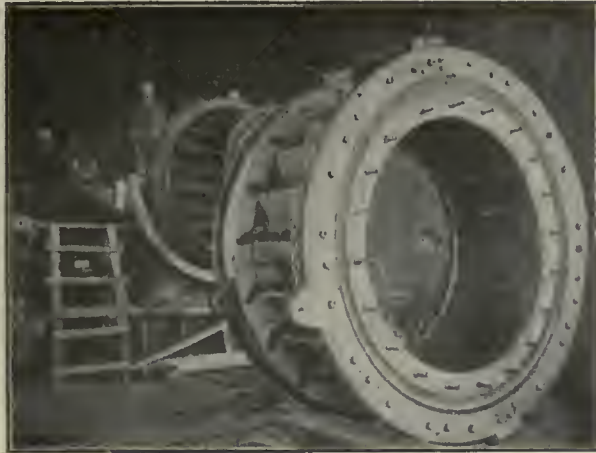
VIEW OF WHEEL CASING SHOWING SHUTTERS.
